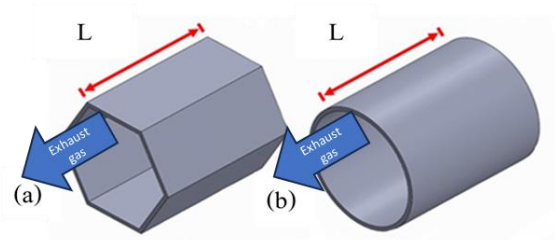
Air jacket models a) Hexagonal geometry and b) Cylindrical geometry with length (L)
